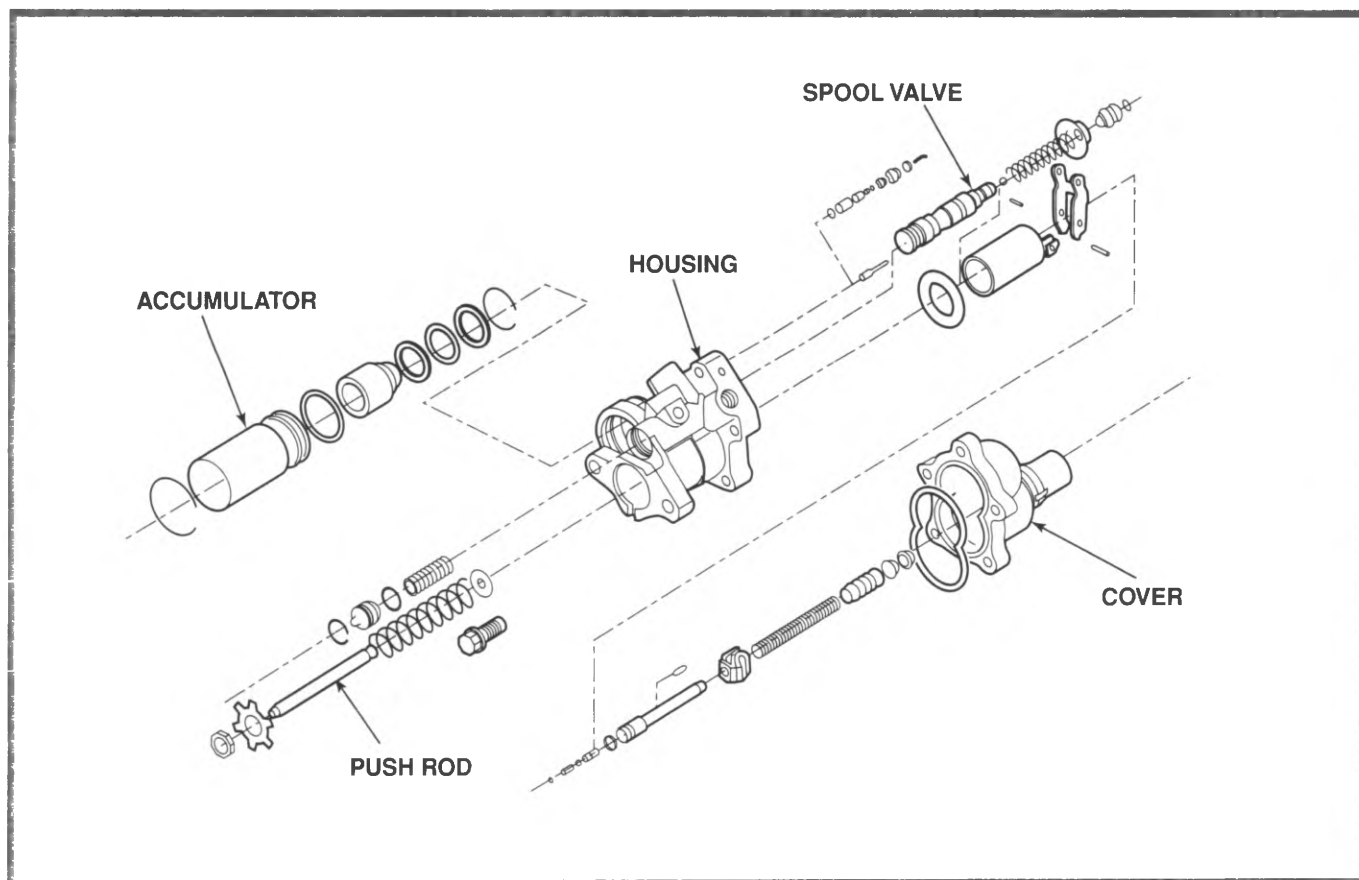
, Hydraulic Booster Assembly – Disassembled
